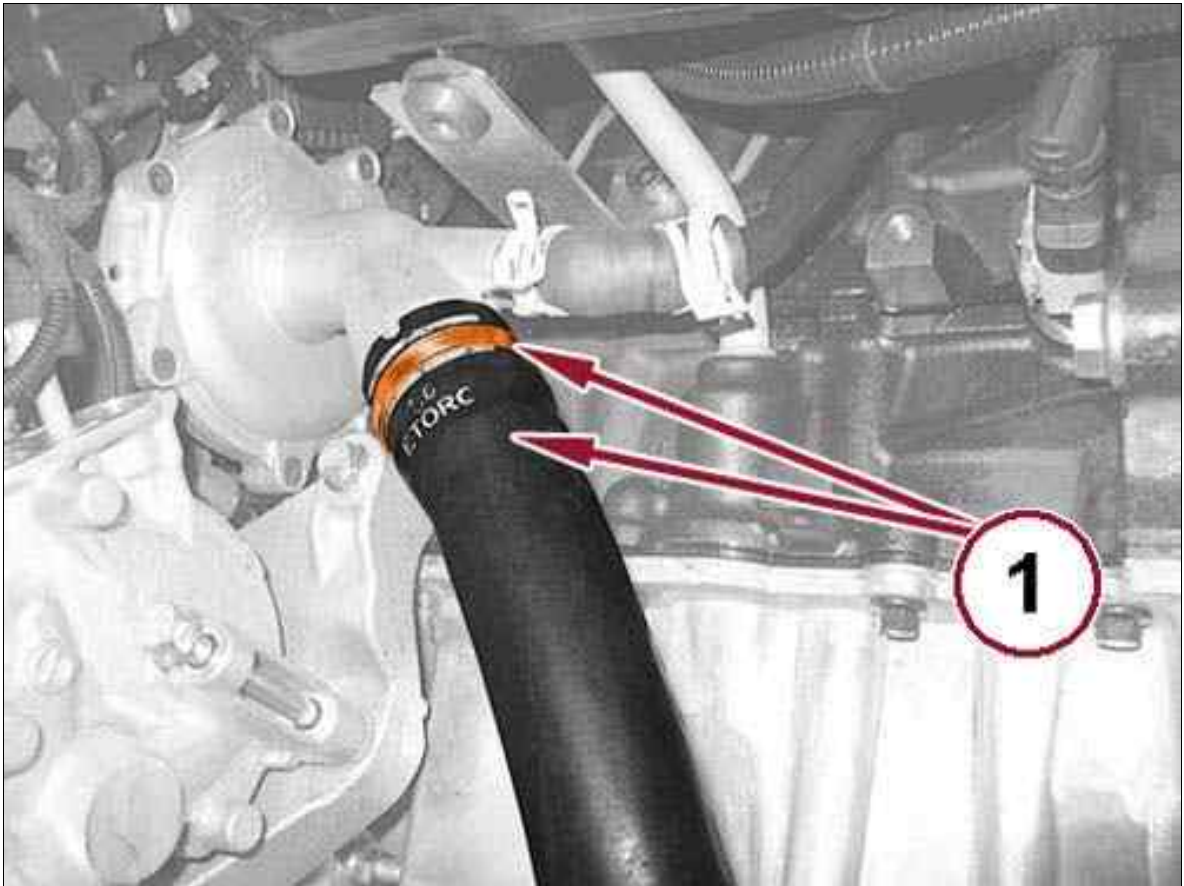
Quick Coupling At Degassing Pipe - Thermostat Side
